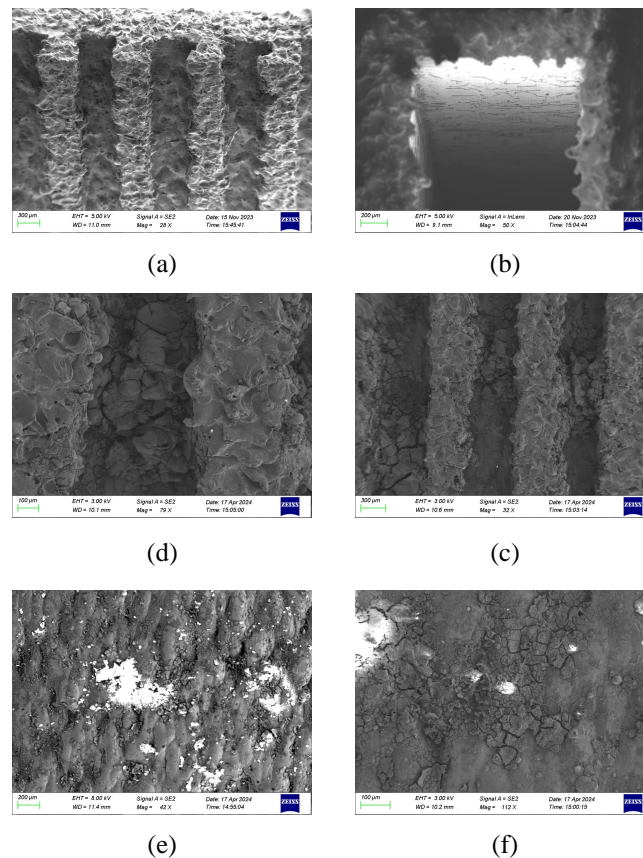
SEM images illustrating the channels: (a) Tubes that have not undergone pressure testing. (b) Machined tube channel surface. (c) Cracks in the inner tube channel (wide field view). (d) Cracks in the inner tube channel (focused view). (e) Cracks in the inner tube channel (wide field view). (f) Cracks in the inner tube channel (focused view).
